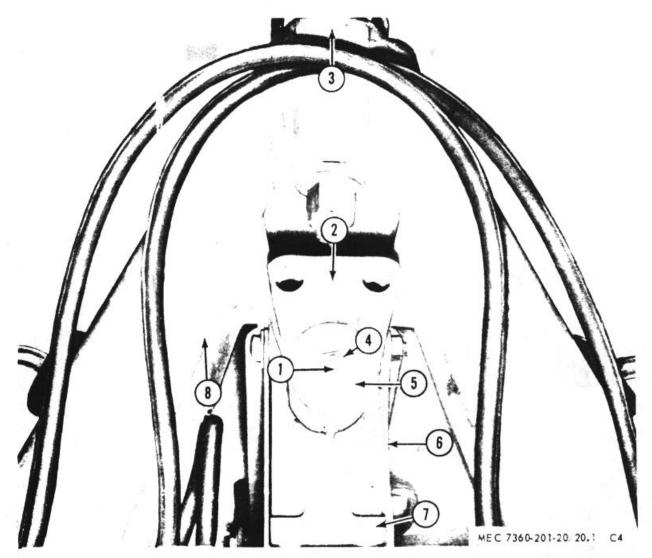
(Added) Handbrake lever, mounted on trailer (M553 bakery oven).
